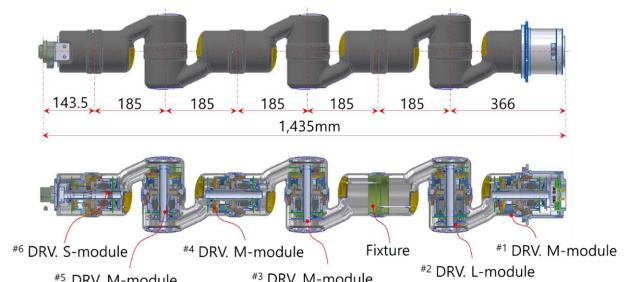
Internal parts configuration of weld manipulator (6DOF)
